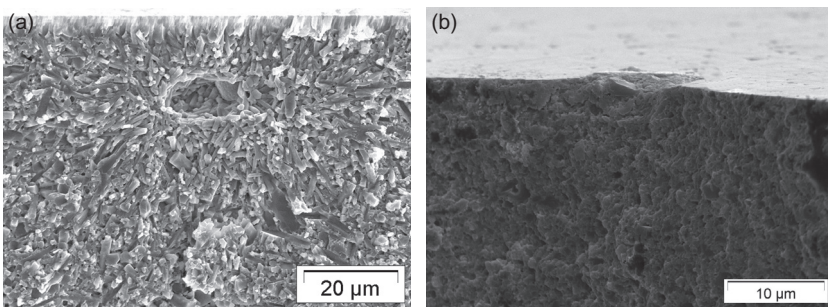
Fracture origins in silicon nitride bending specimens: (a) Volume flaw; and (b) Machining flaw.
